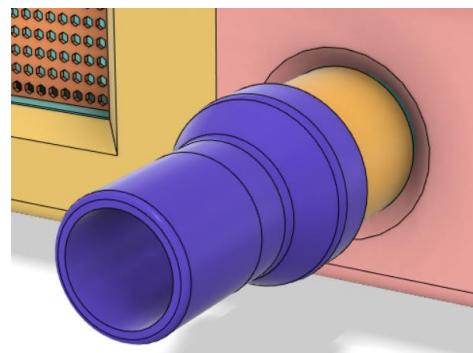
After attaching the One-way Valve to the outlet of the PRM
